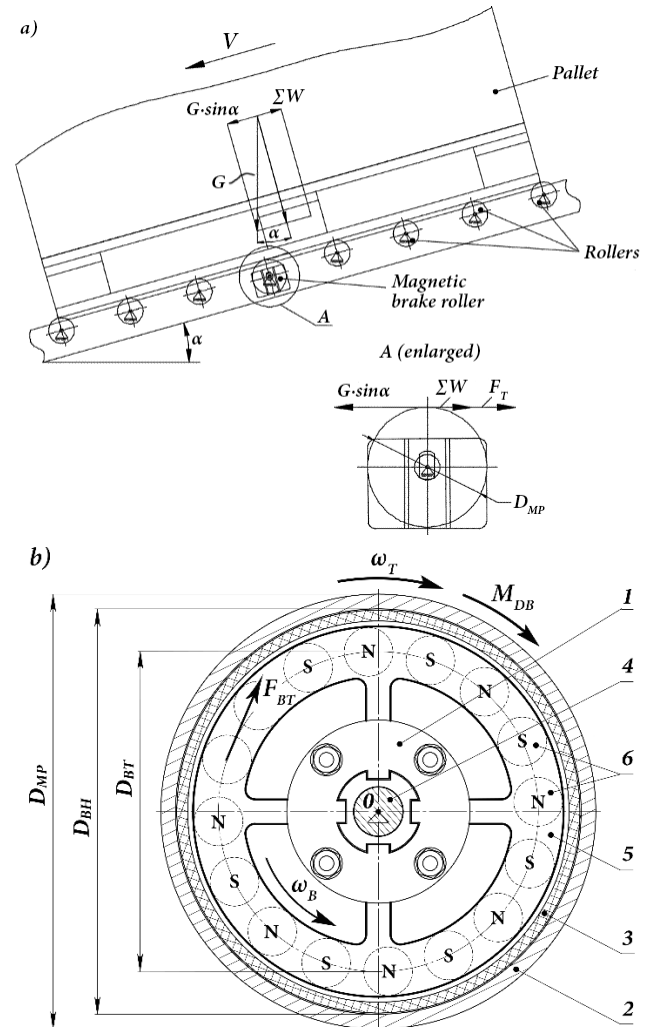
Design schemes of (a) GFR and (b) MBR: 1 – a hub; 2 – shell MBR; 3 – brake insert; 4 – fixed axis of the brake insert; 5 – copper disc; 6 – permanent magnets. GFR, gravity flow rack; MBR, magnetic brake roller.
